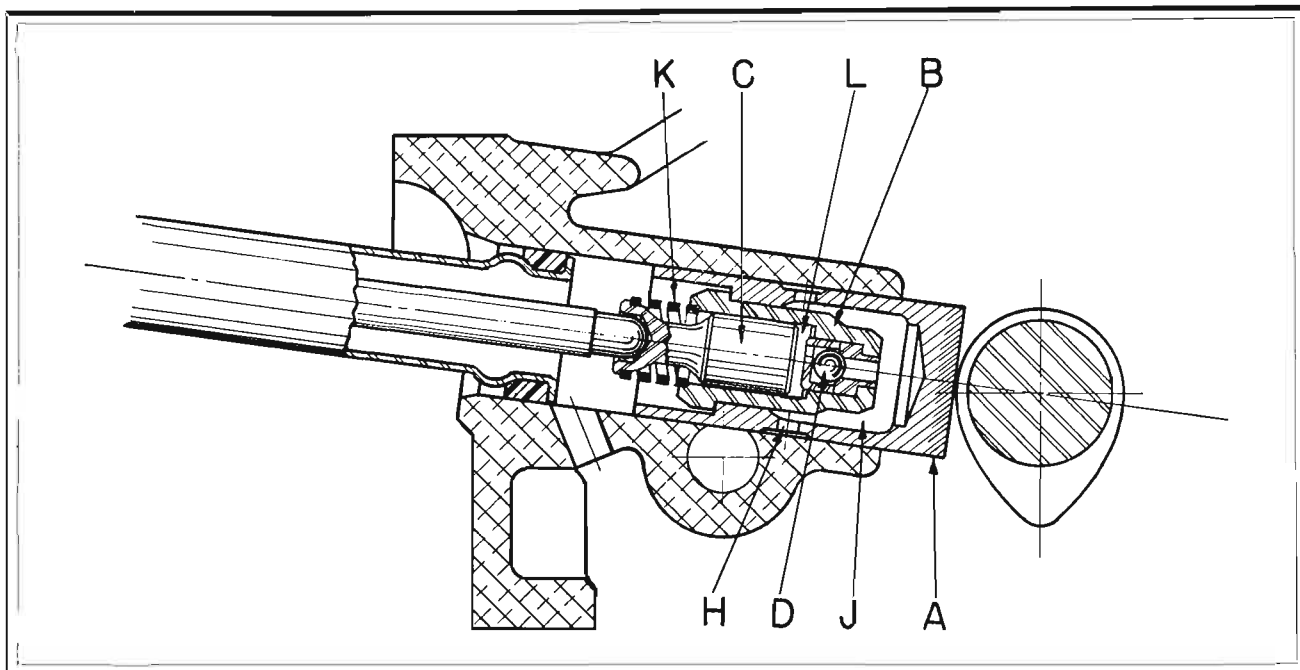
ZERO-LASH HYDRAULIC LIFTER in Franklin Aircraft Engines
